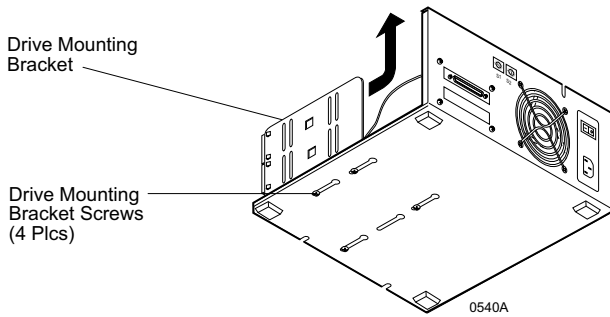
Removing the Drive Mounting Bracket (DS100 2-Bay Shown)
